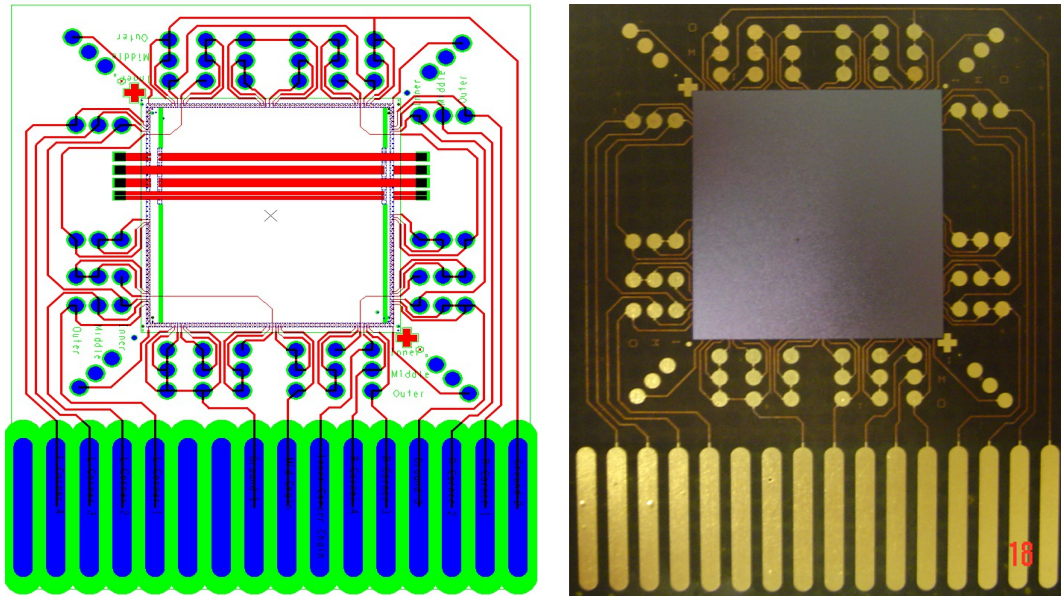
Daisy-chain layout and picture of 100 μ m pitch flip-chip assembly coupon.
